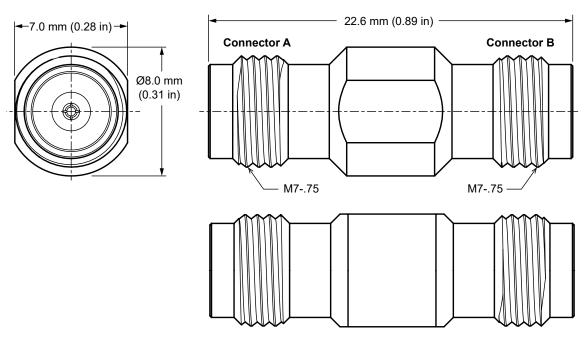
Product Dimensions for the ADP-2.4F-2.4F Adapter
